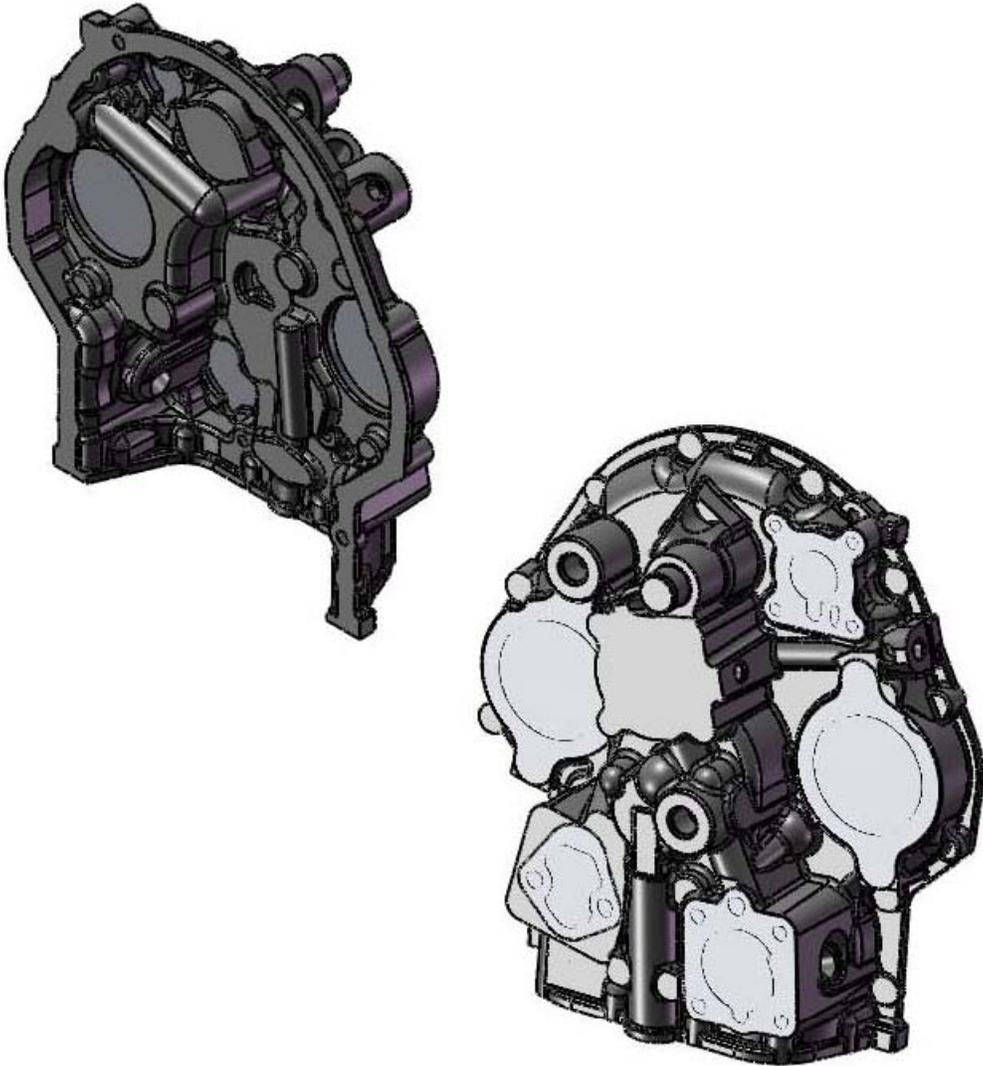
Crankcase Dimensional Inspection Hardware
